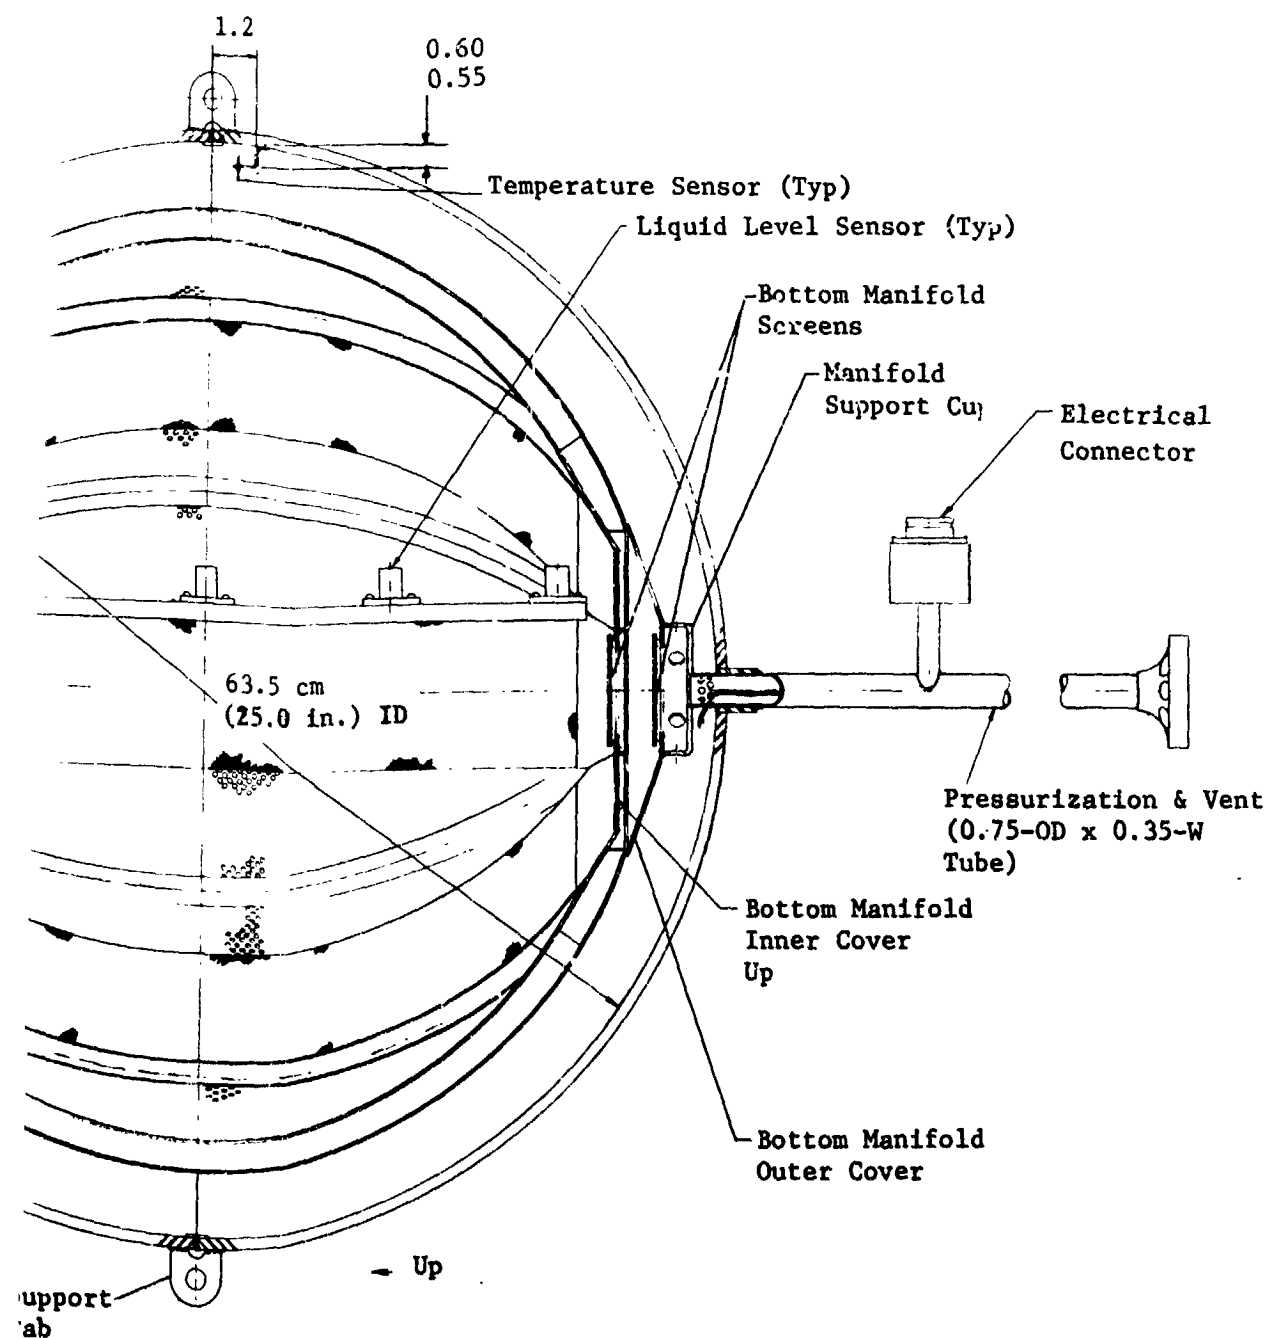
Assembly Drawing for 63.5-cm (25-in.) Subscale Model
